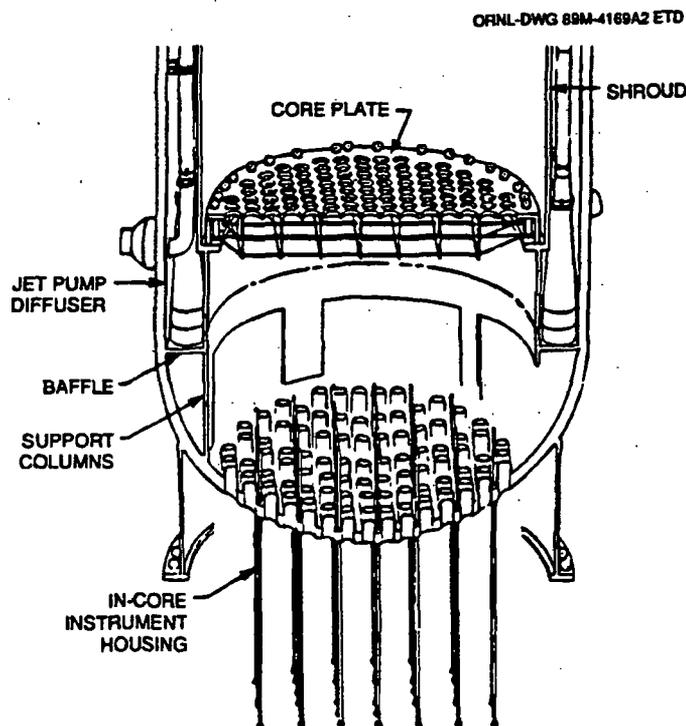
BWR bottom head that accommodates many control rod drive stub tube and in-core instrument housing penetrations
